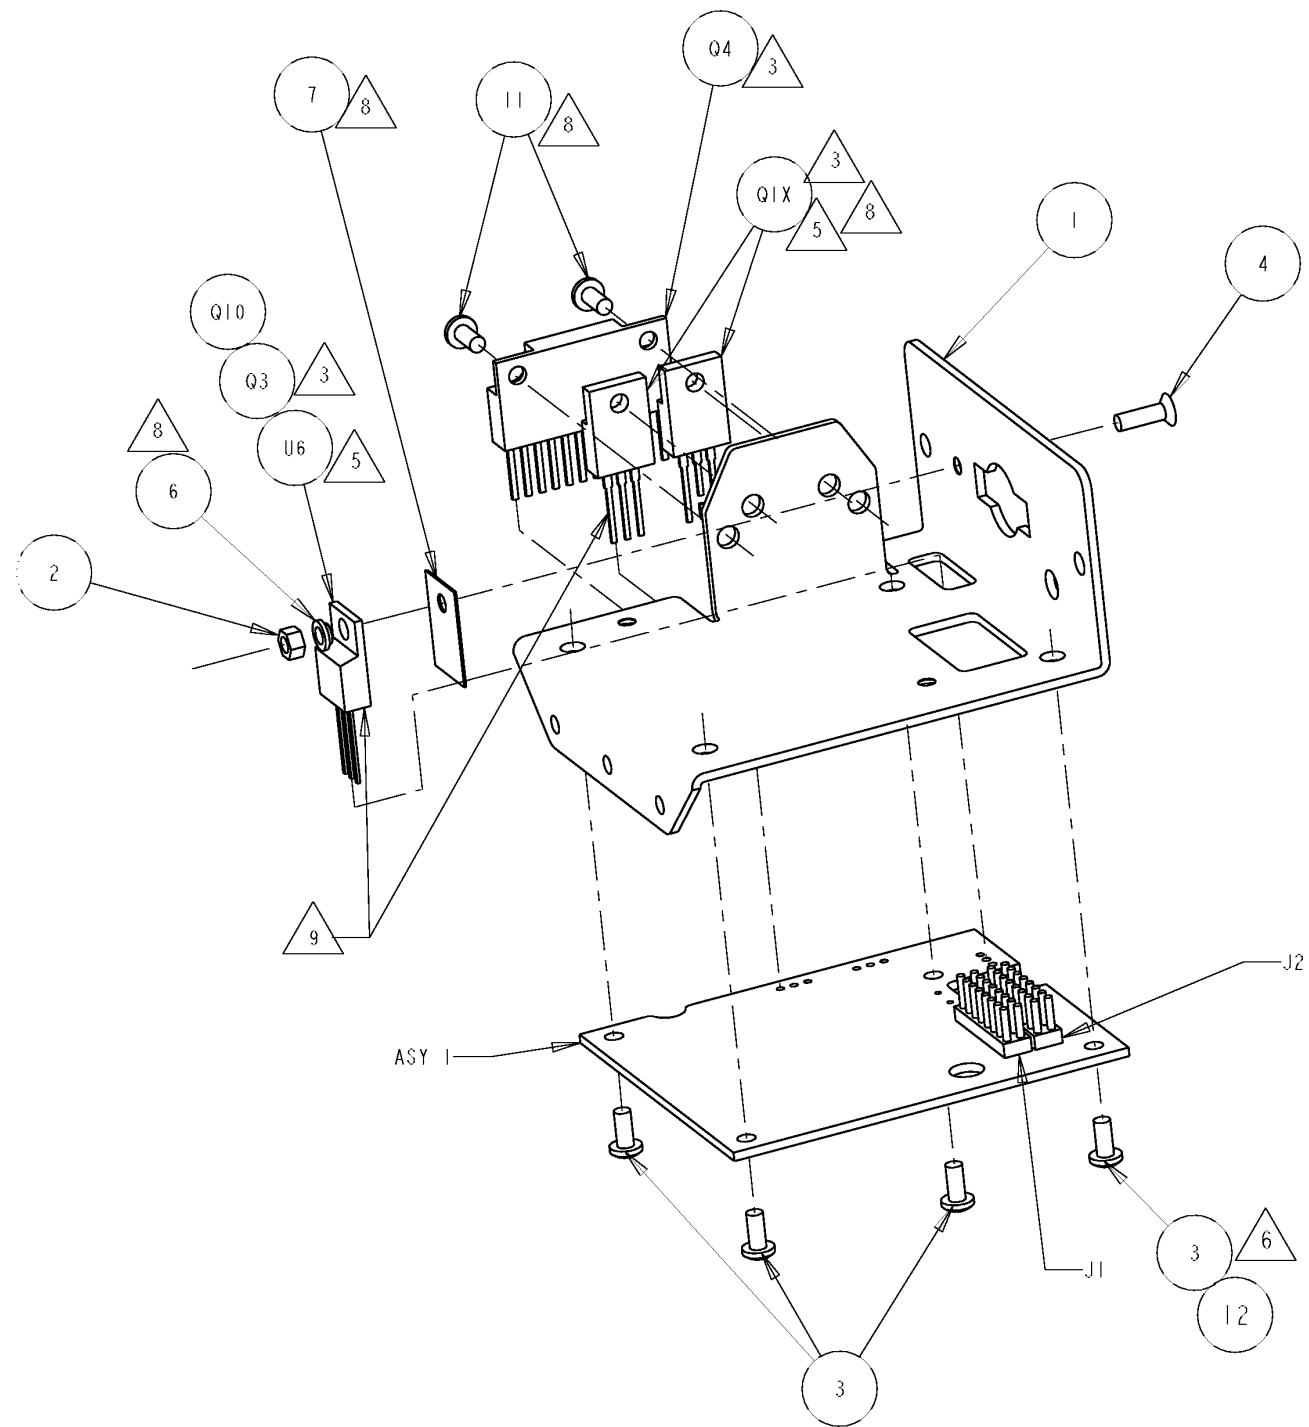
FRONT PLATE ASSEMBLY DWG
